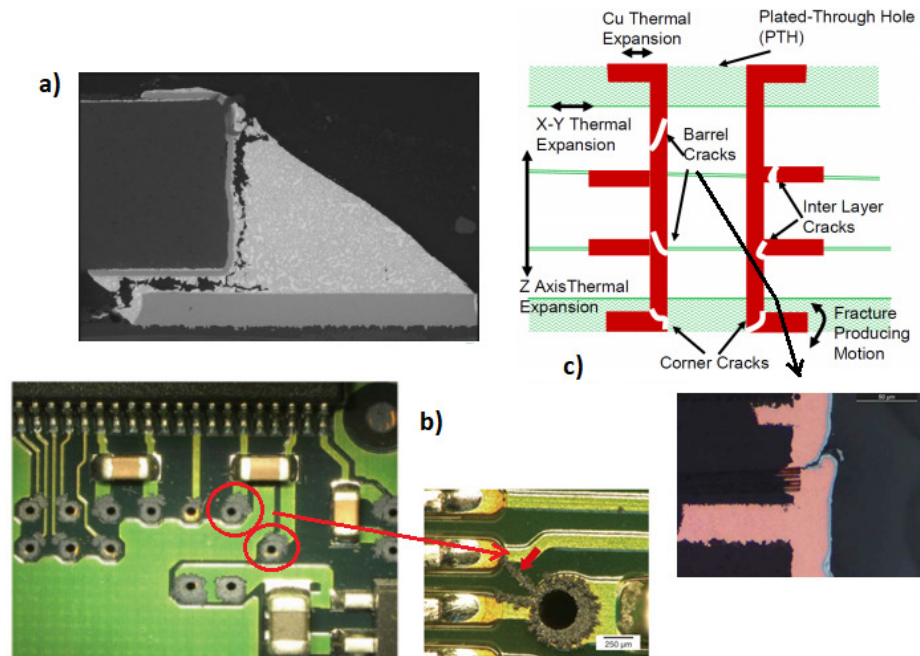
PCB Failures due to Long-Term Stresses [92-96].
